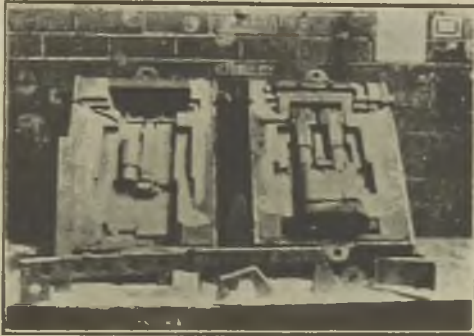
TROJAN CYLINDER MOULD AND JIGS FOR CHECKING DIMENSIONS.
